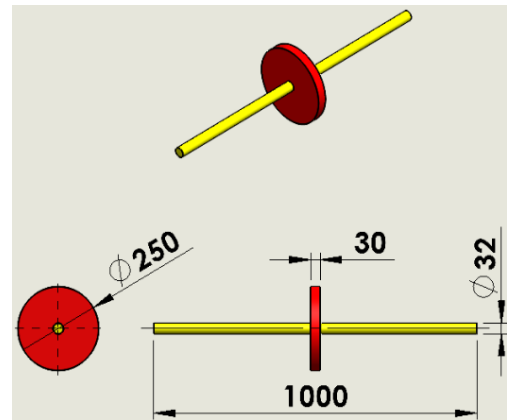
Jeffcott rotor model definition drawing (using Solidworks)
